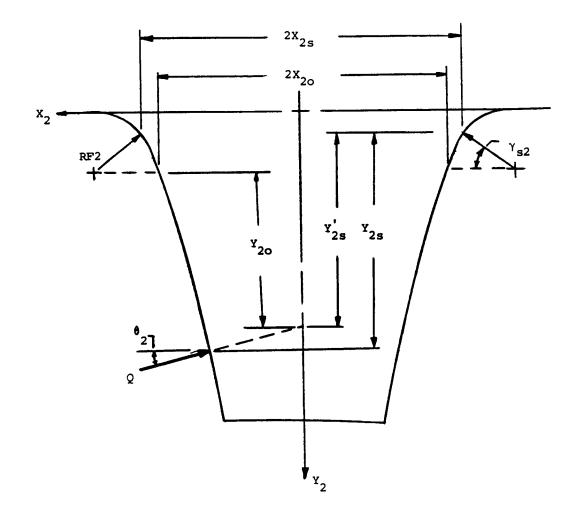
Nomenclature for Modified Heywood Formula -Internal Gear Tooth hub and ring, equation (40) is considered to be representative of the peak stresses of gear 1 and 2.
